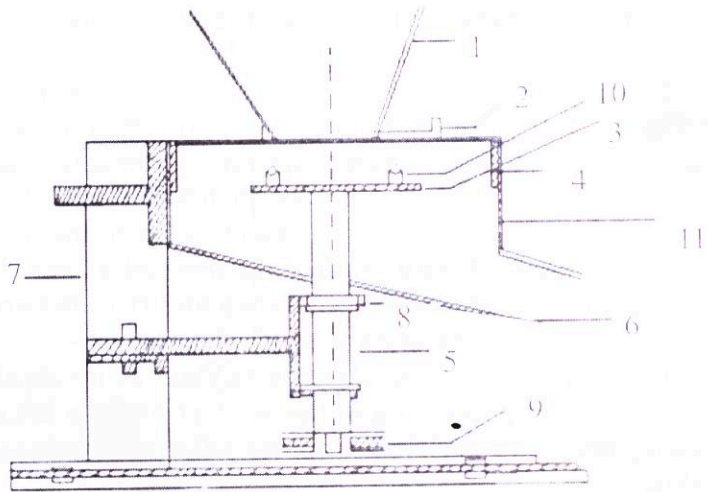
Sectional view of vertical-shaft centrifugal palm nut cracker
